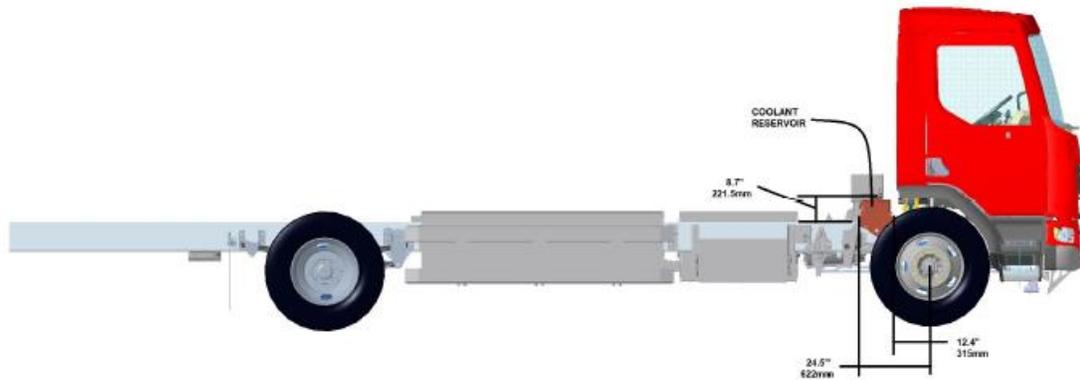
Side View —Model 220 BEV Coolant Reservoir Left Side frame
